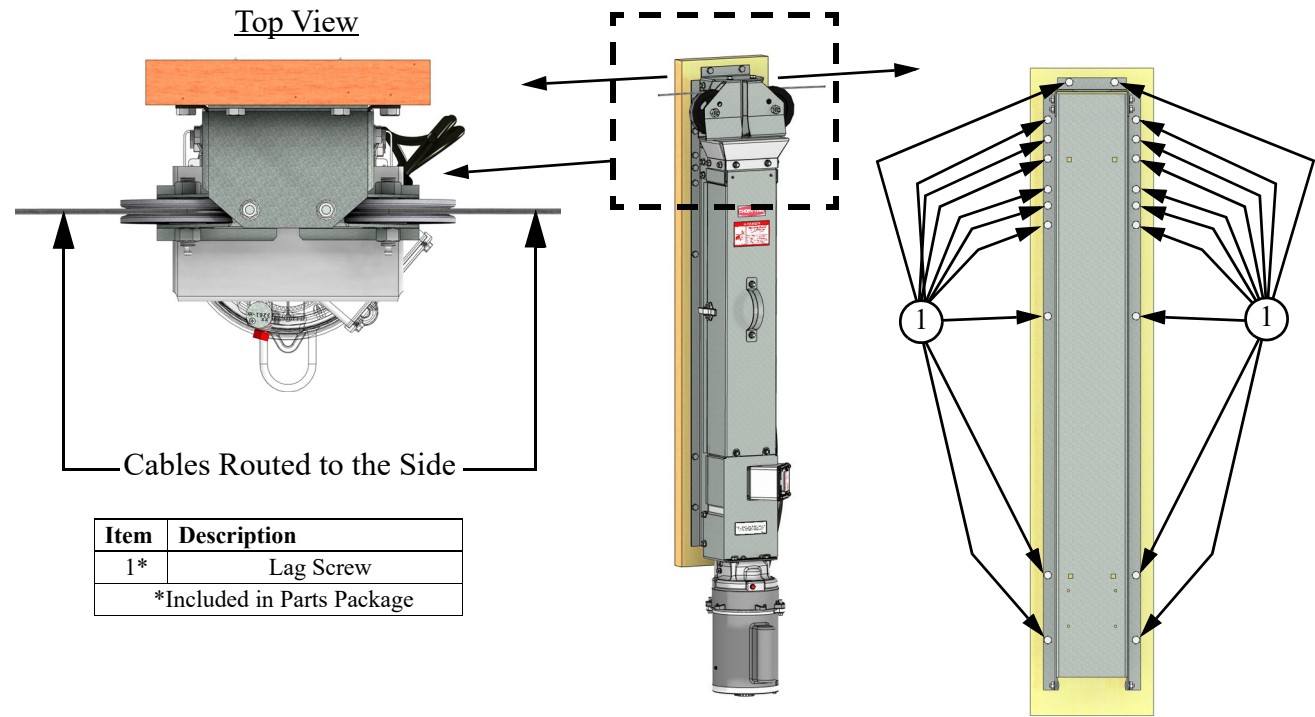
To the Side Lift Mounting (Cable Version Shown)
